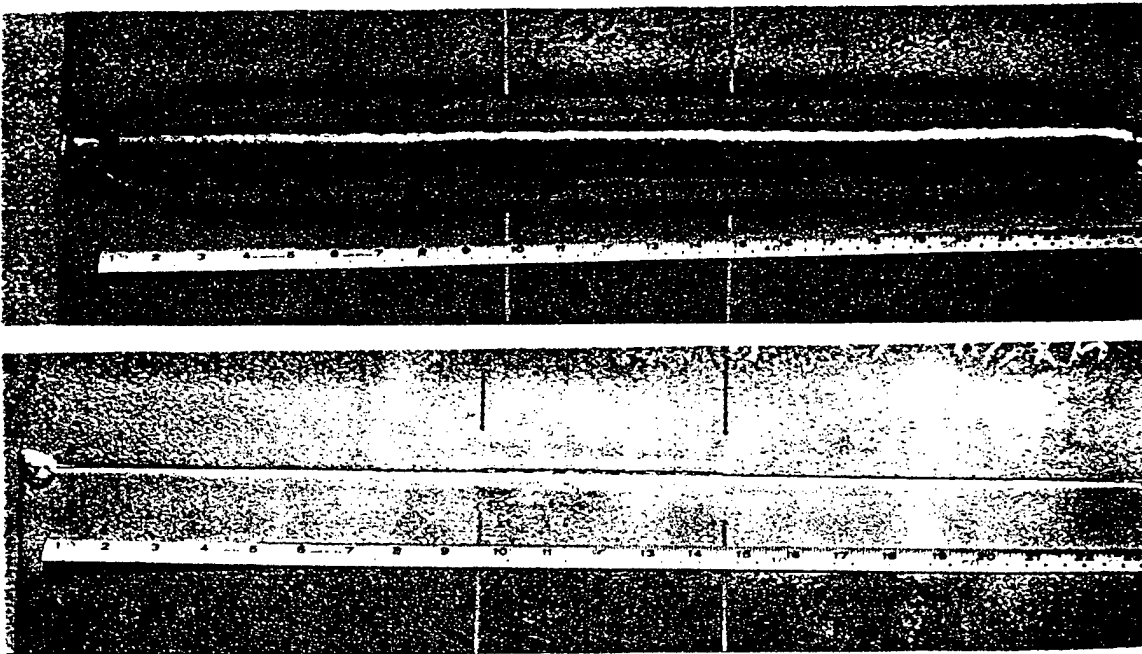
Photograph showing the top and bottom sides of butt joint weld with variable gap performed with automatic control.
